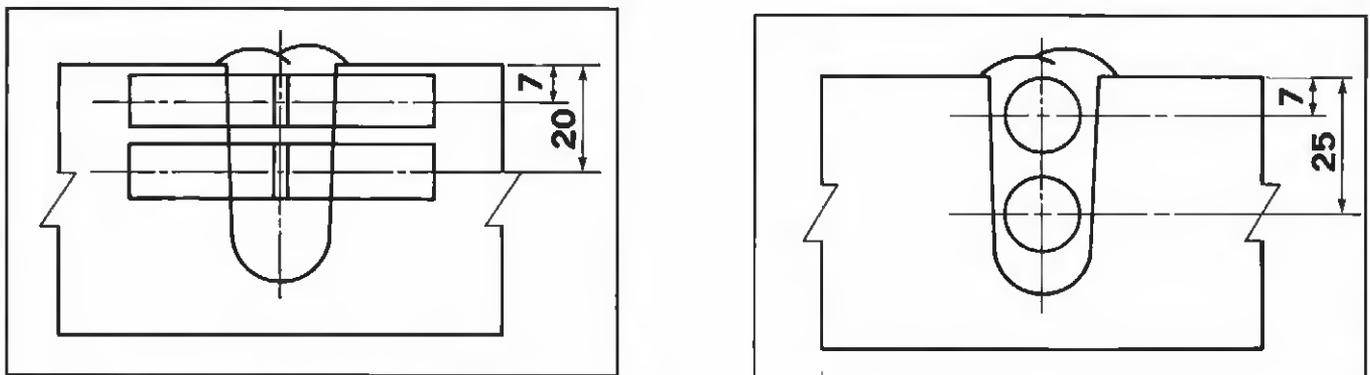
Location of test specimens (in mm). A — Charpy impact test specimen; B — tensile and creep rupture specimen.
